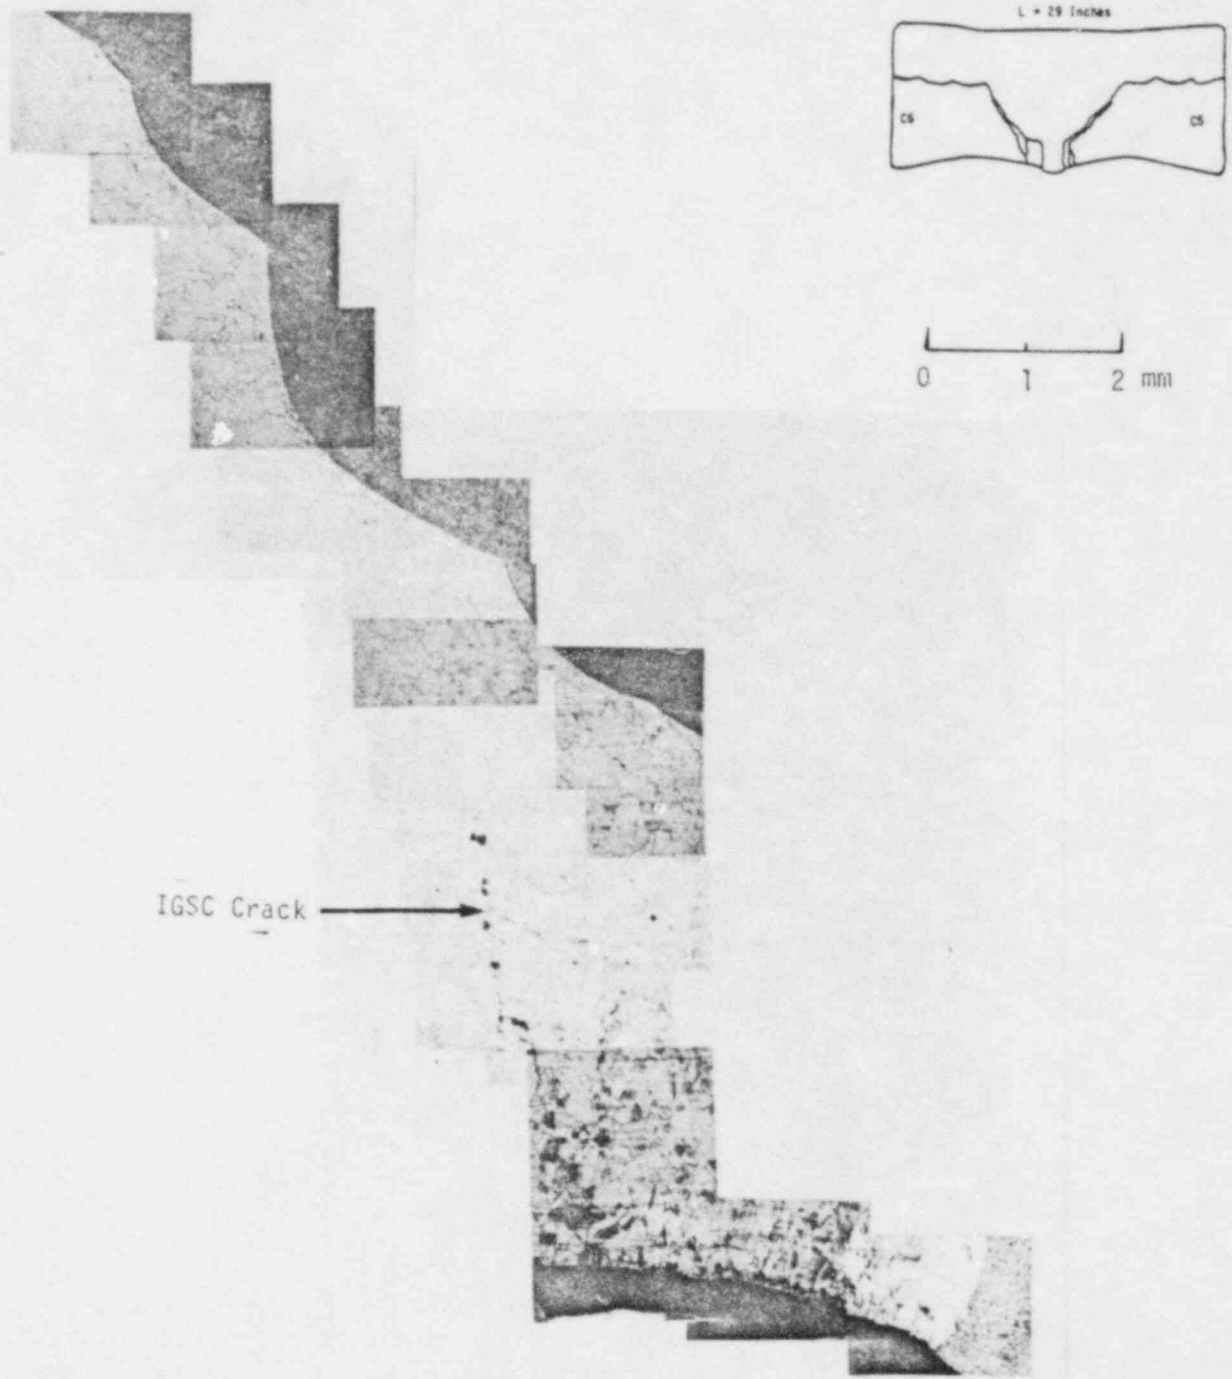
Cross Section of C6 Side of NC5-C6 at 29 Inches, Indicating a Through-Wall Depth of 61% of the Original Pipe Wall. (Crack Depth = 0.484 Inch; Total Remaining Wall = 0.603 Inch.) Source: Becker et al., EPRI NDE Center, April 1985.
